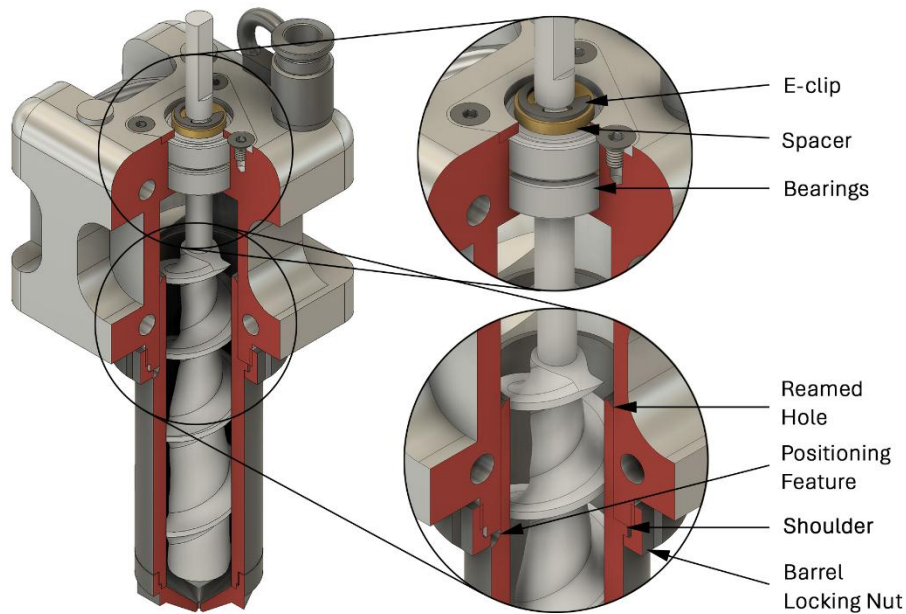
Section view of assembly including feeding block, barrel and extrusion screw with detail of bearing chamber and barrel locking including guiding feature.
